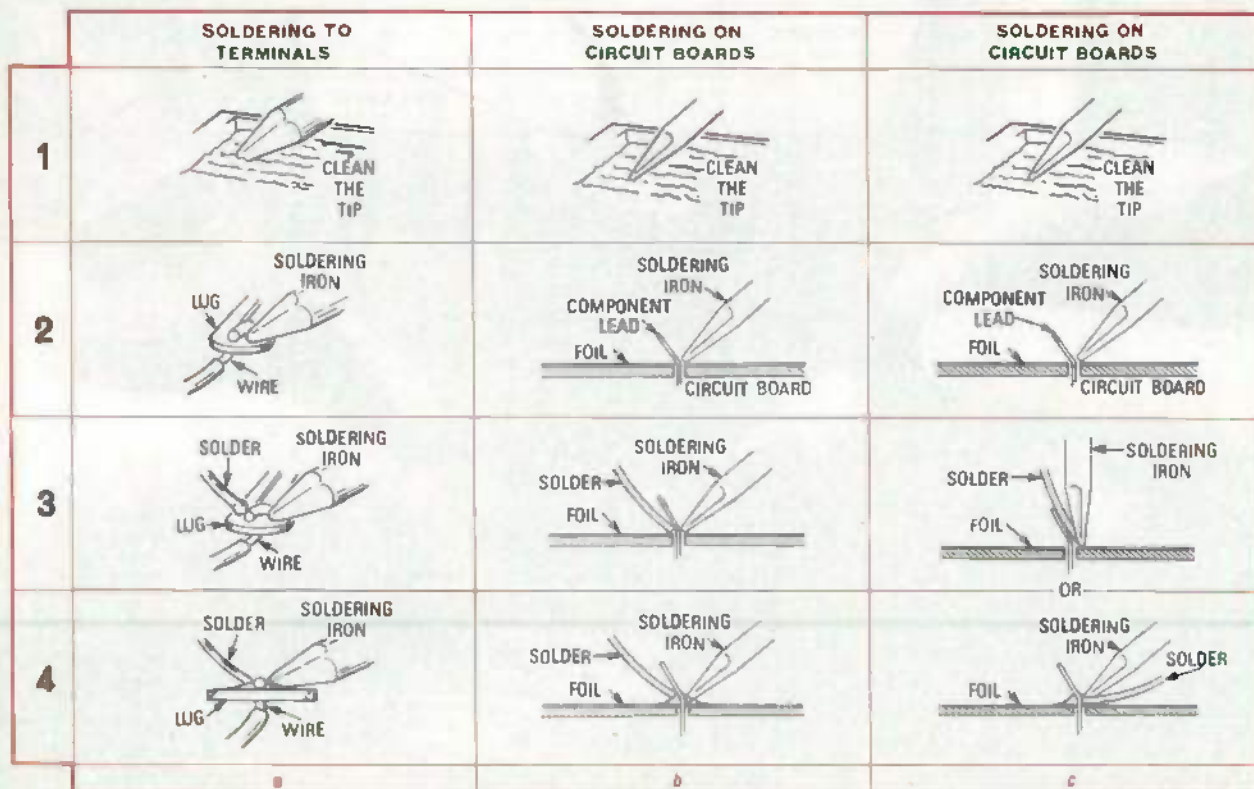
ALTHOUGH IT'S USUAL to heat the material to which solder will be applied (a and b), the heat is applied to the solder (c) when soldering hairline printed-circuit traces.
